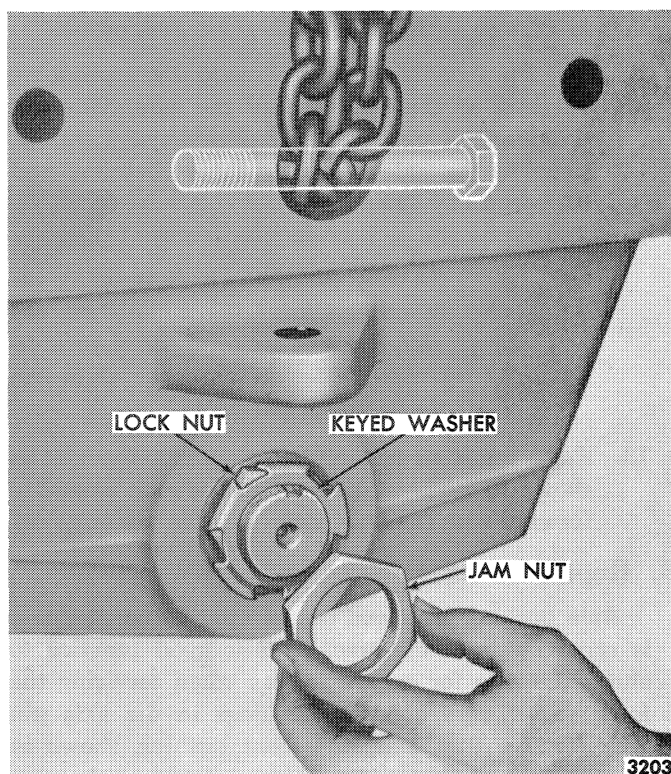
Removing Axle Pin Jam Nut and Lock Nut
